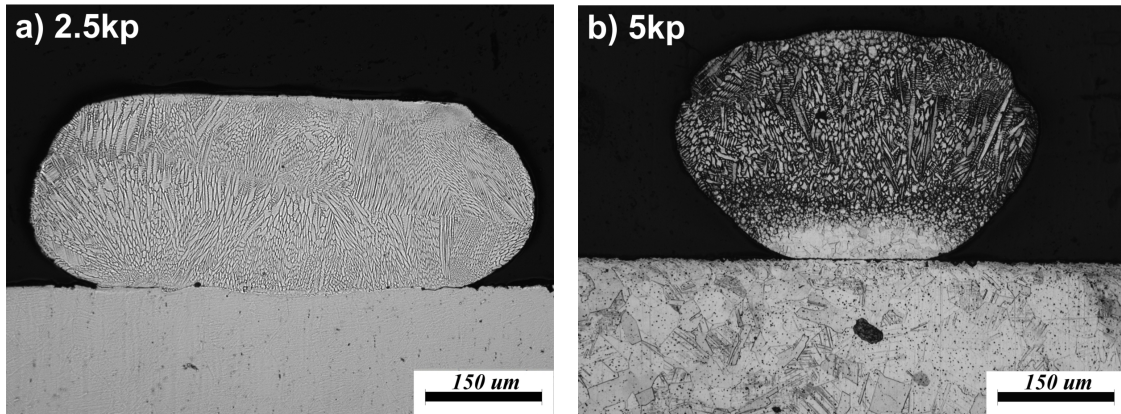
Weld cross section for 200A, a) 2.5kp, b) 5kp
